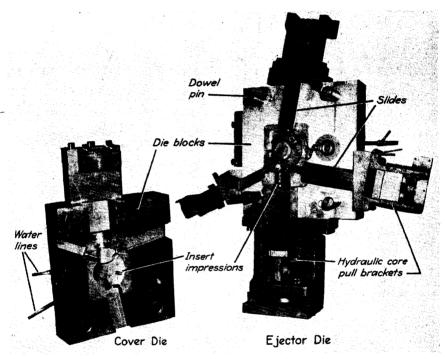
Cover and ejector die for producing an aluminum machine part. Different steels are used for the different components, as shown in Table 6.3.
